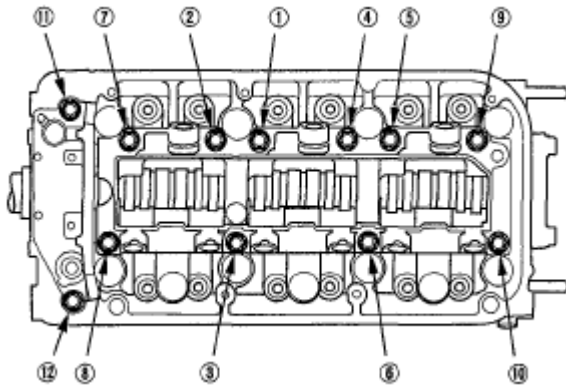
Identifying Cylinder Head Bolts Removing Sequence - Front
